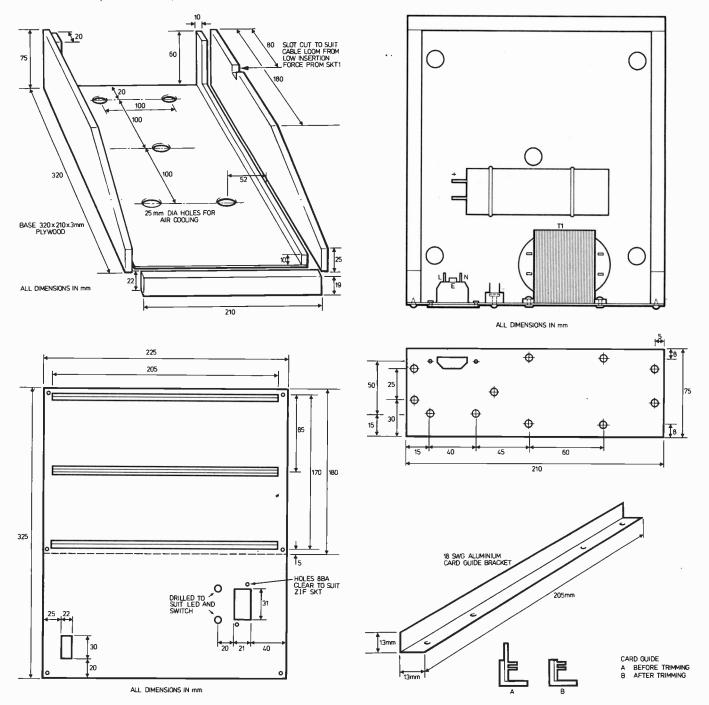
Physical dimensions of CHAMP-PROG chassis
